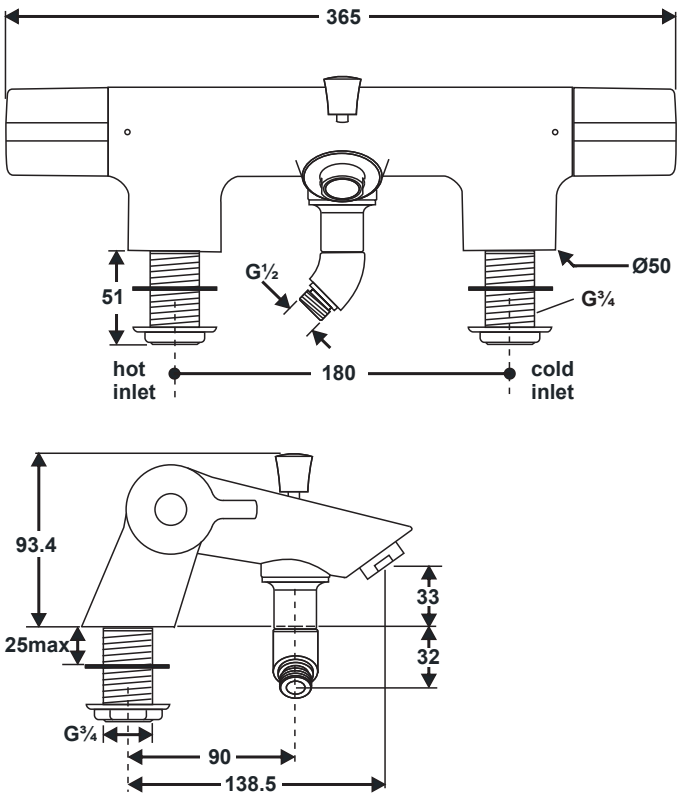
Exploded view of Bath Shower Mixer A4989AA
